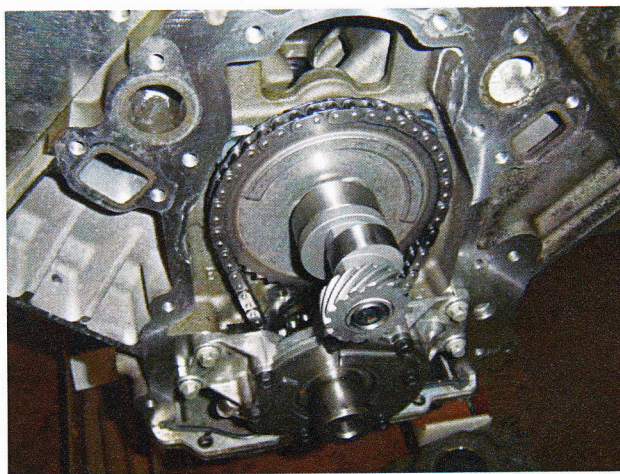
Complete drive unit installed on end of Camshaft. Shows how fuel pump & cam drive gear should look installed.
